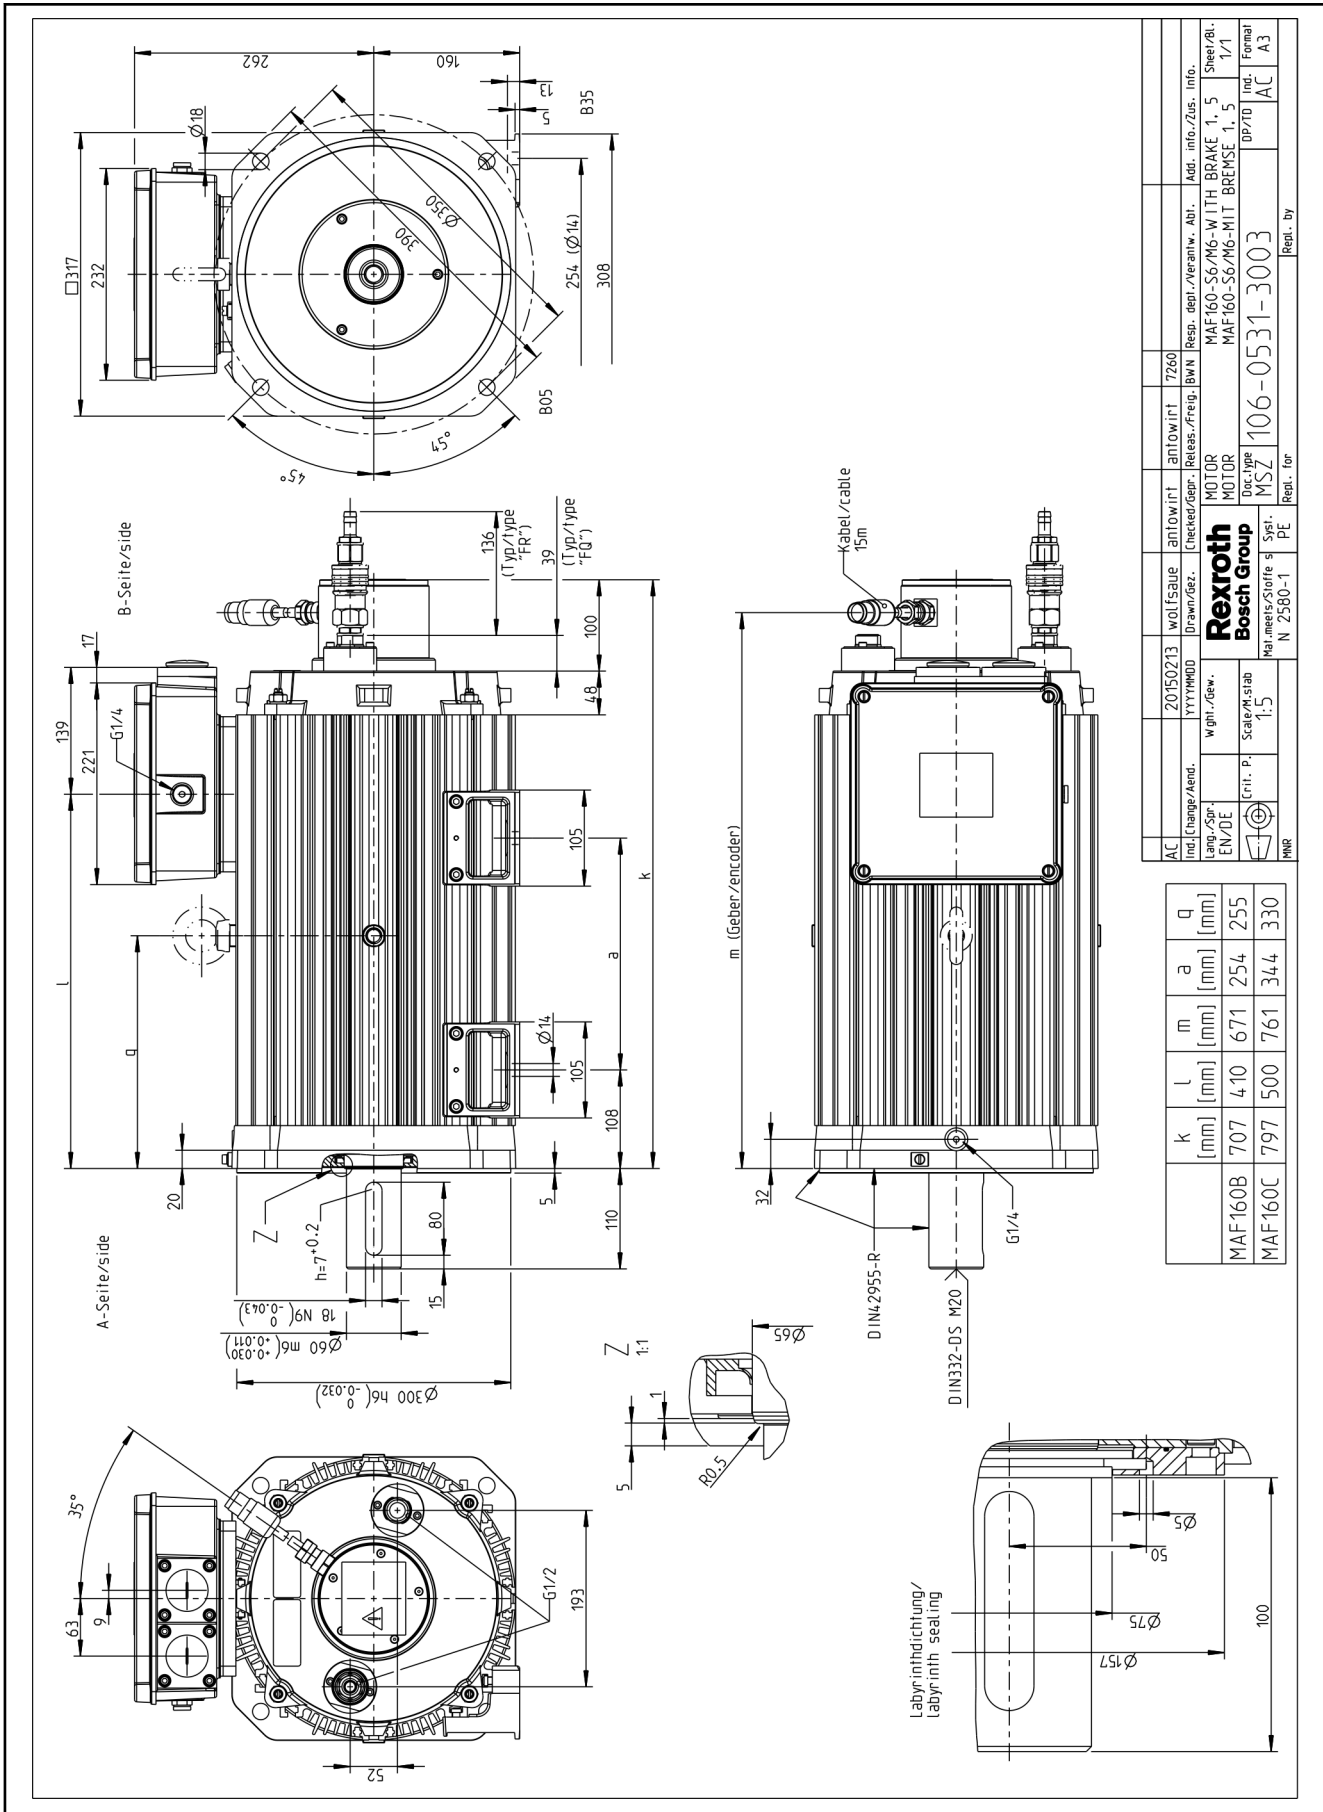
MAF160 with M6/S6 encoder, brake 1/5
